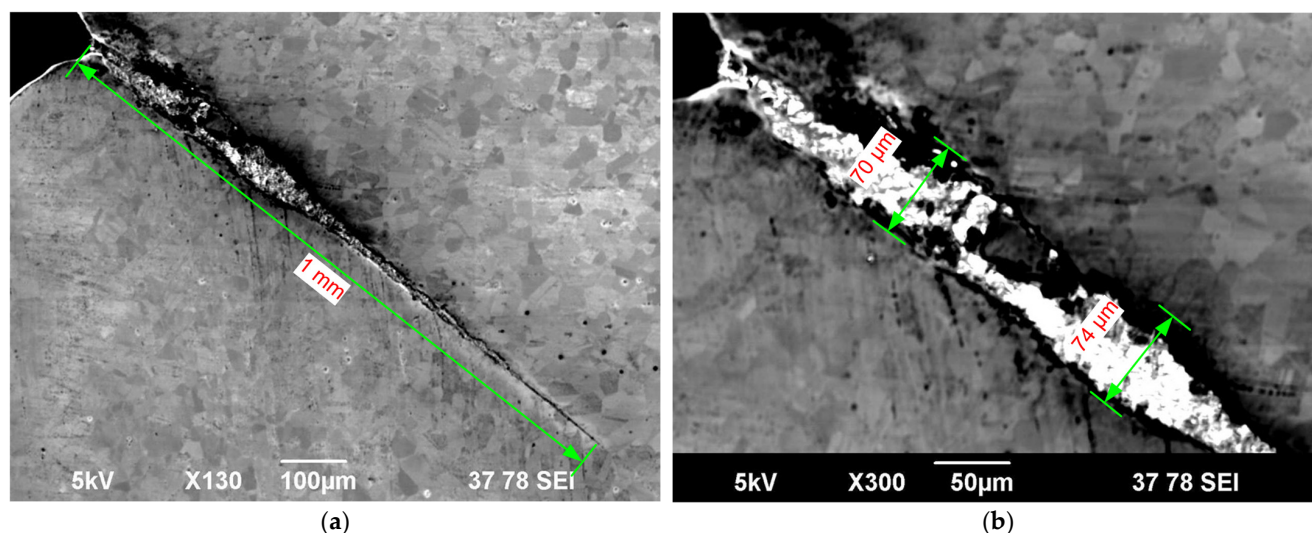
Weld joint area of Sample No. 2: (a) region with incomplete fusion (lack of penetration); (b) surface view of a channel filled with non-conductive material.
